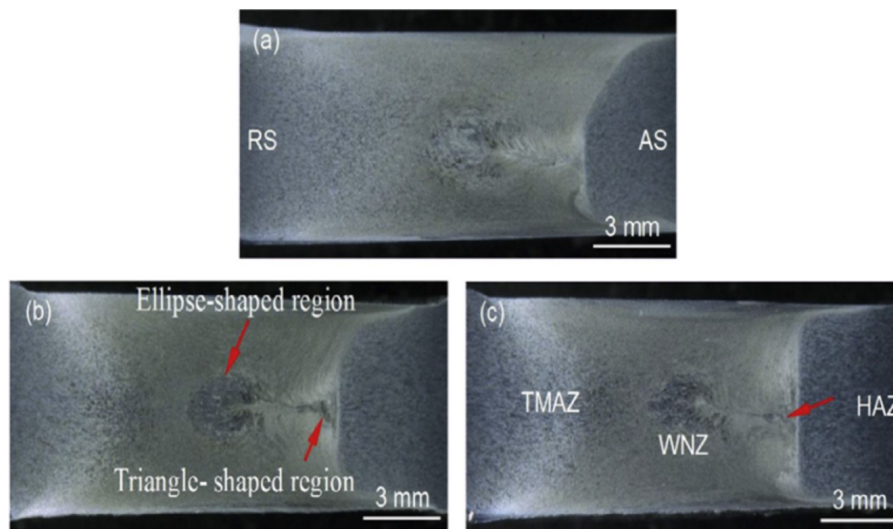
Macrographs of AA2A14-T6 showing formation of ellipse and triangle shaped region in the middle layer of NZ at constant 400 rpm tool rotation and at different welding speeds (V): (a) V=50 mm/min, (b) V=100 mm/min, (c) V=150 mm/min [165].
